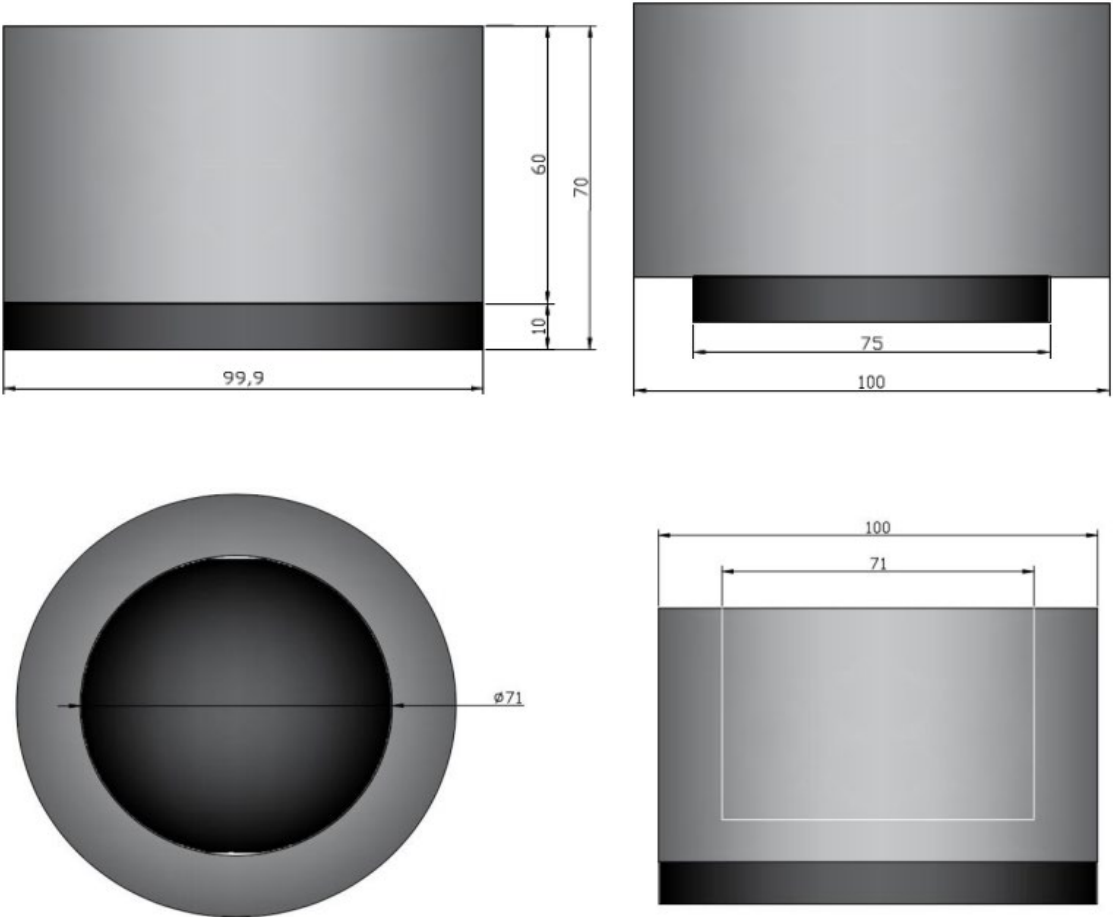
Technical drawing of the attachment cups by (Vo T. & Hestholm K., 2019)
